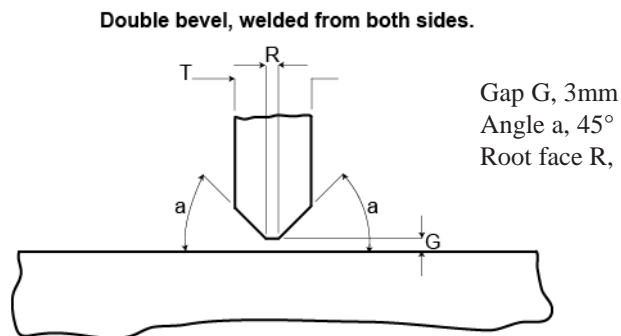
Weld preparation for the RQT 701 Fillet welded T joint
